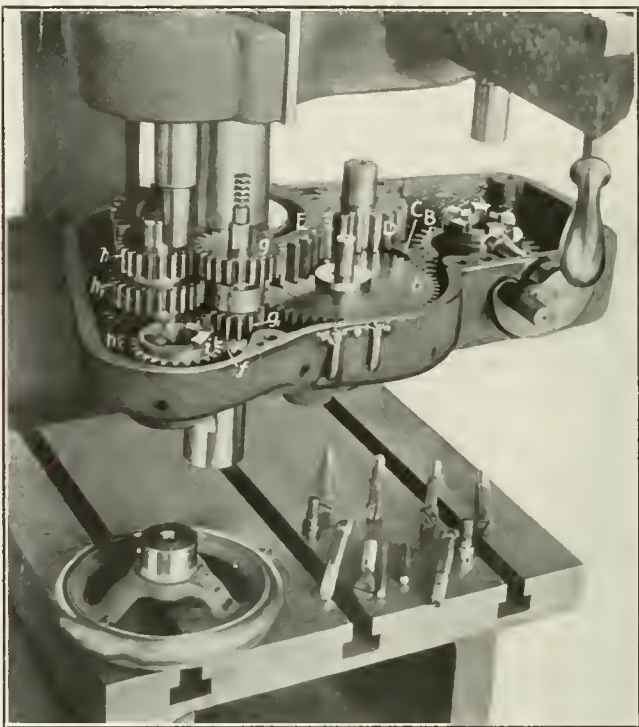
Case lowered to expose Feed-change and Spindle-driving Gears
